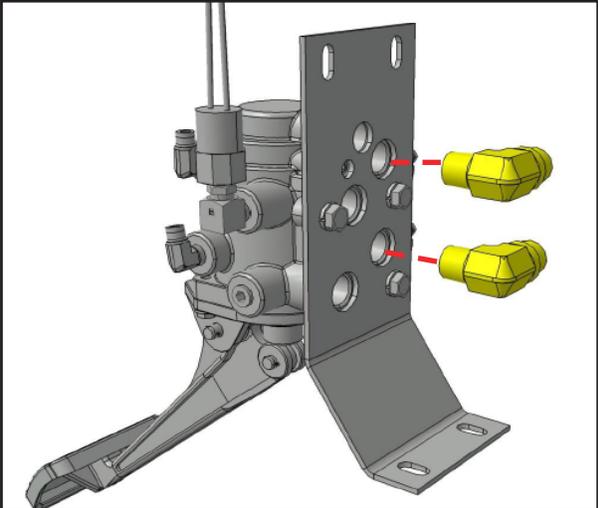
Remove and retain the two remaining 90° push-to-connect fittings.
